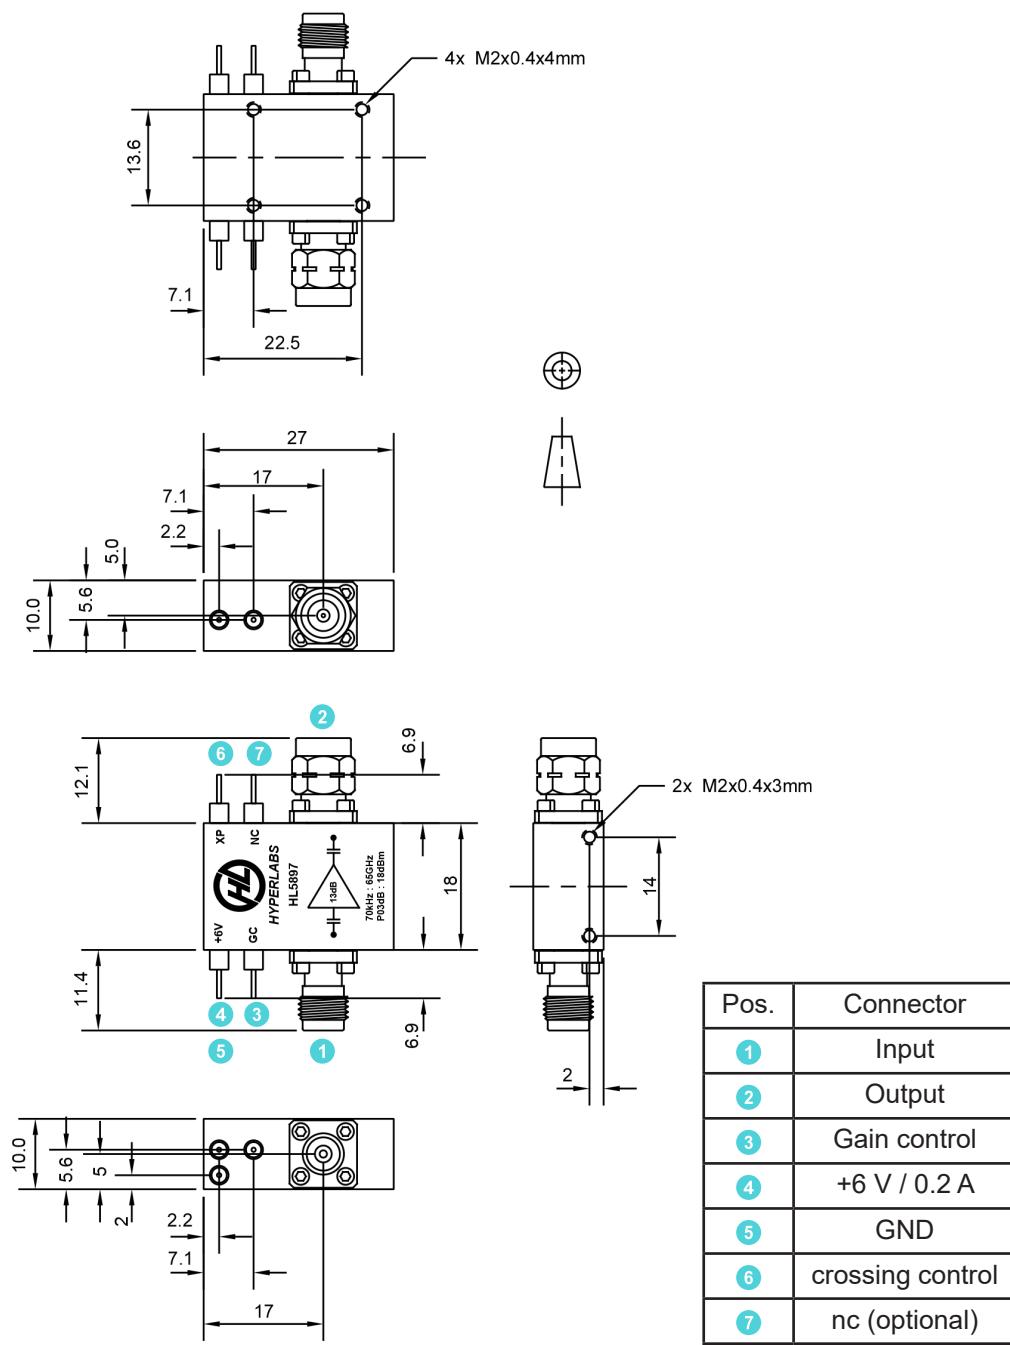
HL5897 mechanical drawing (opt. -18-JP), mm
